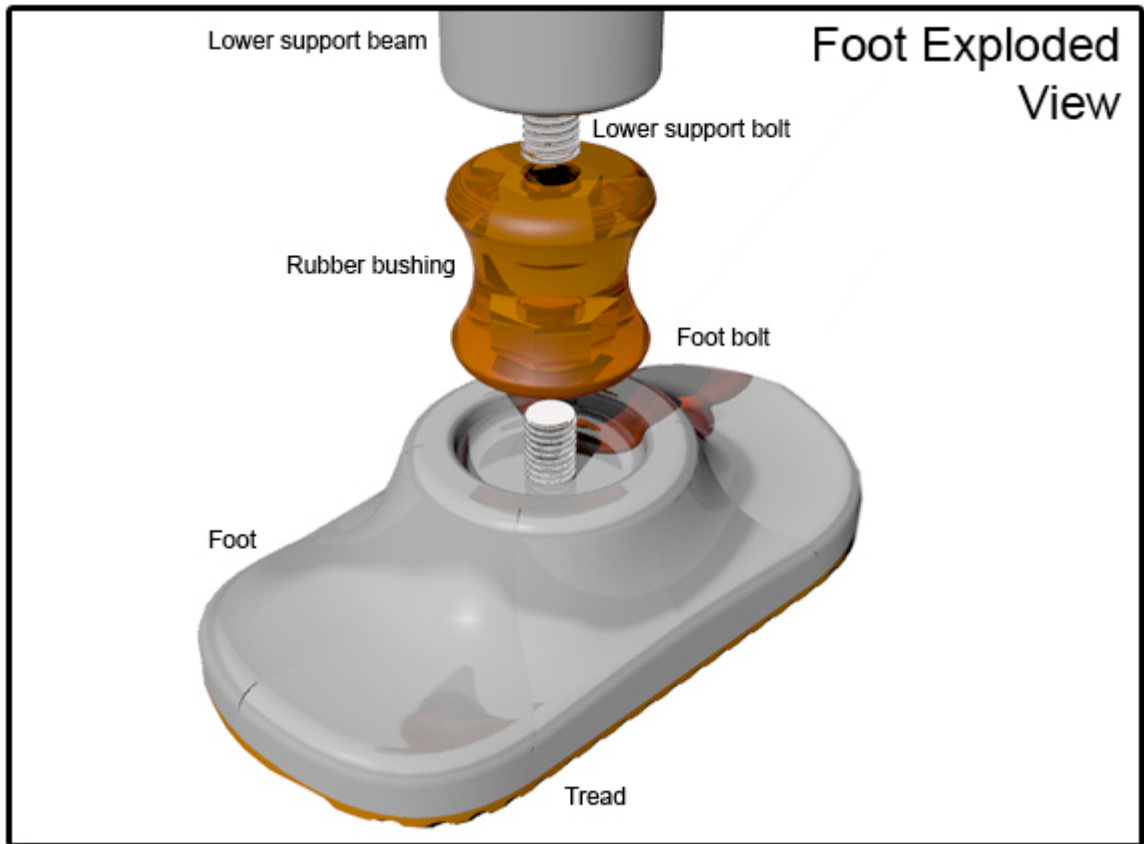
is an exploded view of the foot component of the Peg-Asyst.
